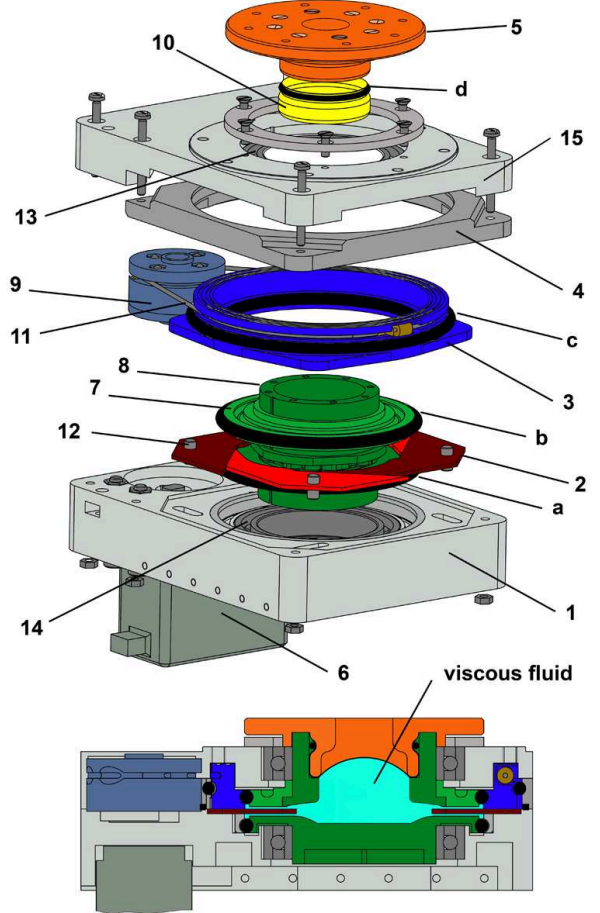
Exploded 3D view and section of the variable damping system with basic components highlighted. The viscous fluid is represented in light blue. The laminar fluid shear is generated between petals 2 and rotors 8,7.
